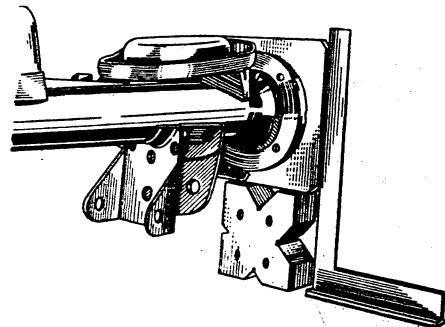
Checking the Rear Axle Beam for Twisting Deformations with Angle Gauge Applied to Edge of Flange A.70172
